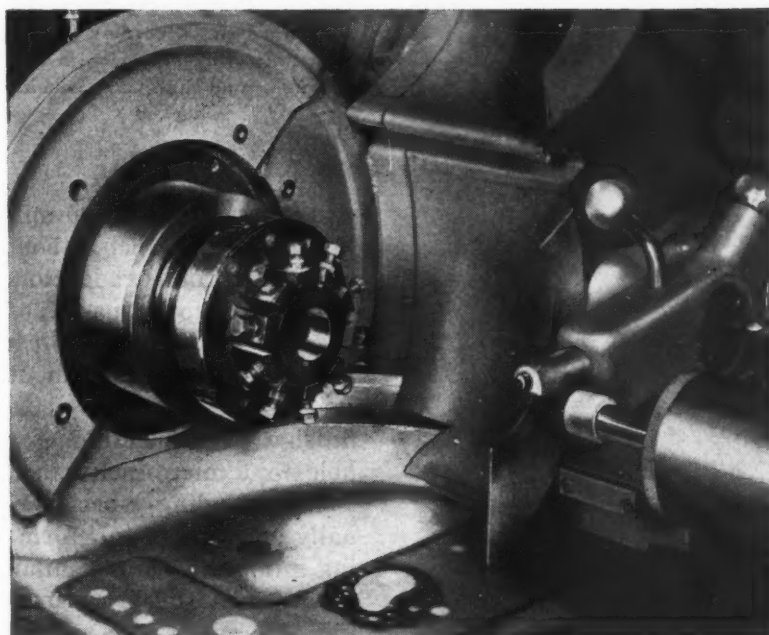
A Ring Gage which has been Ground to a 0.6 Micro-inch r.m.s. Finish is Shown Mounted in the Diaphragm Chuck of an Internal Grinder. The Grinding Wheel has Not Become Loaded or Glazed
